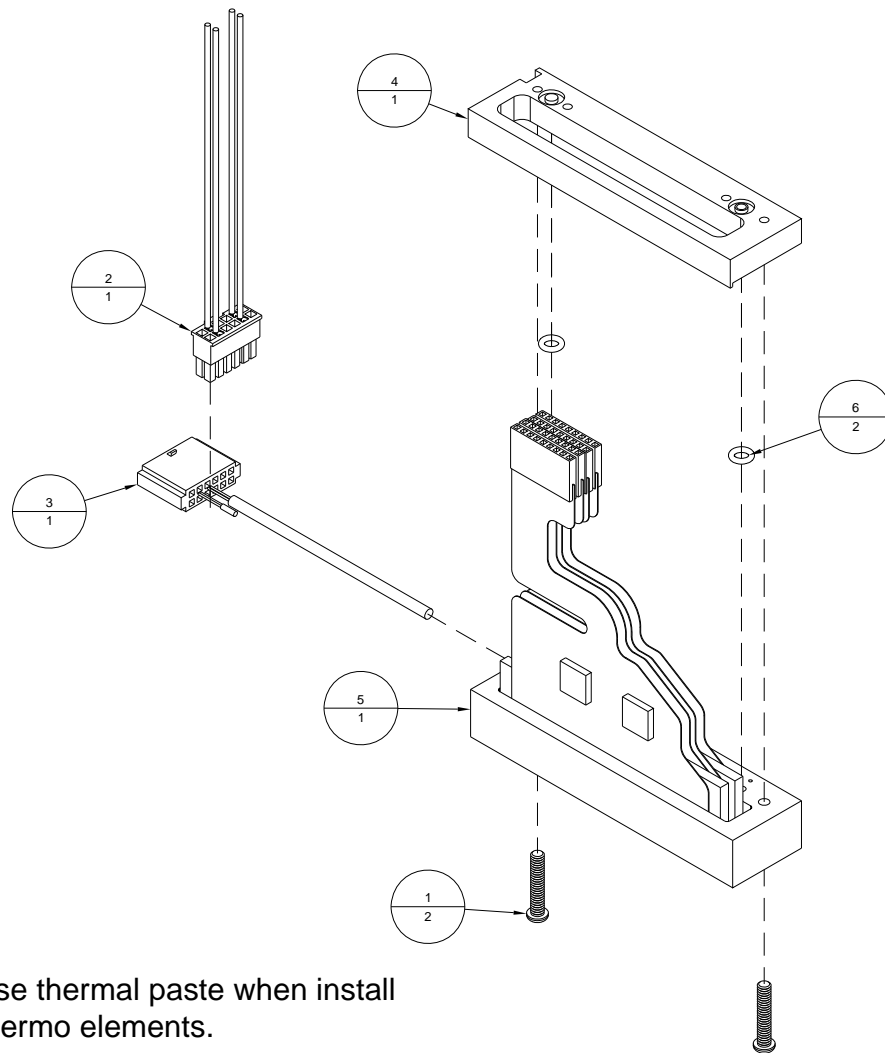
9103168A - Slide Bar Assembly, 80 pL
